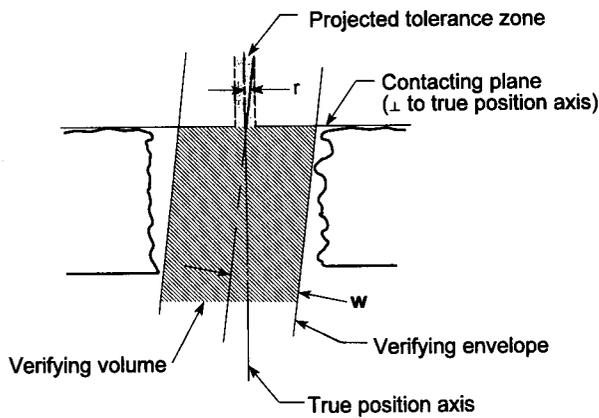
PROJECTED TOLERANCE ZONE FOR A HOLE
